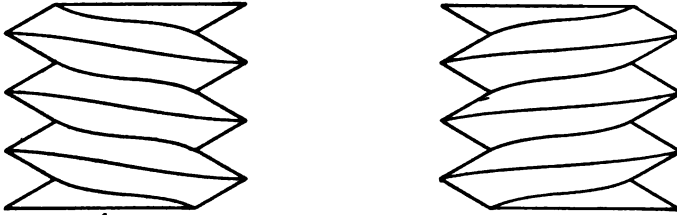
Simple Drawing for Left and Right-Handed V Screw Threads
